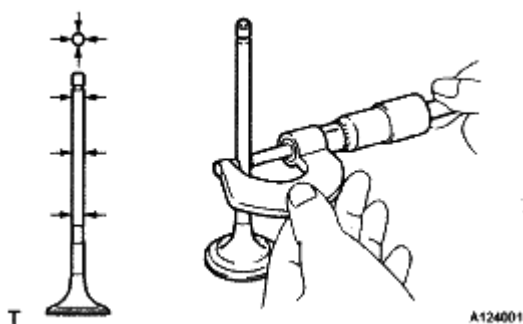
Measuring Diameter Of Exhaust Valve Stem Using Micrometer
